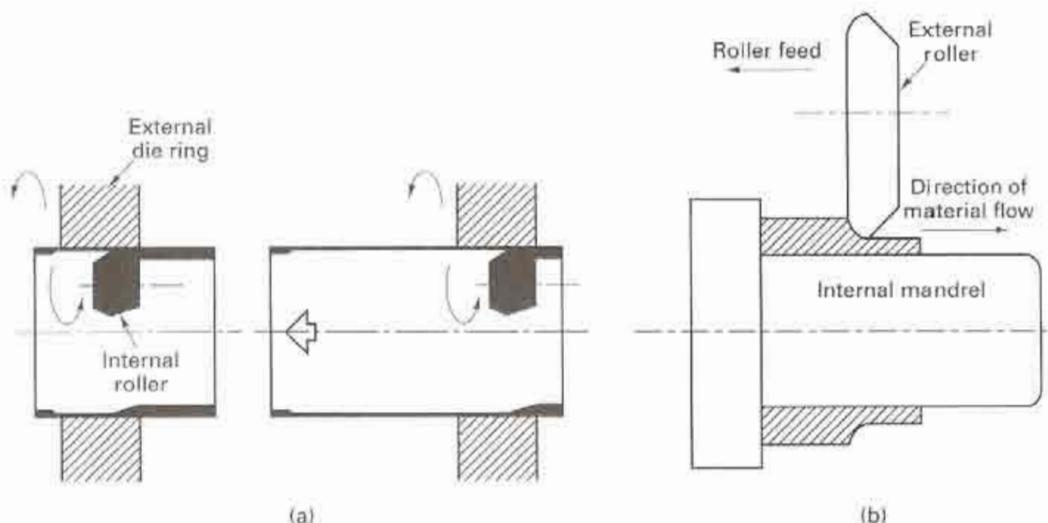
The roll-extrusion process: (a) with internal rollers expanding the inner diameter; (b) with external rollers reducing the outer diameter.
